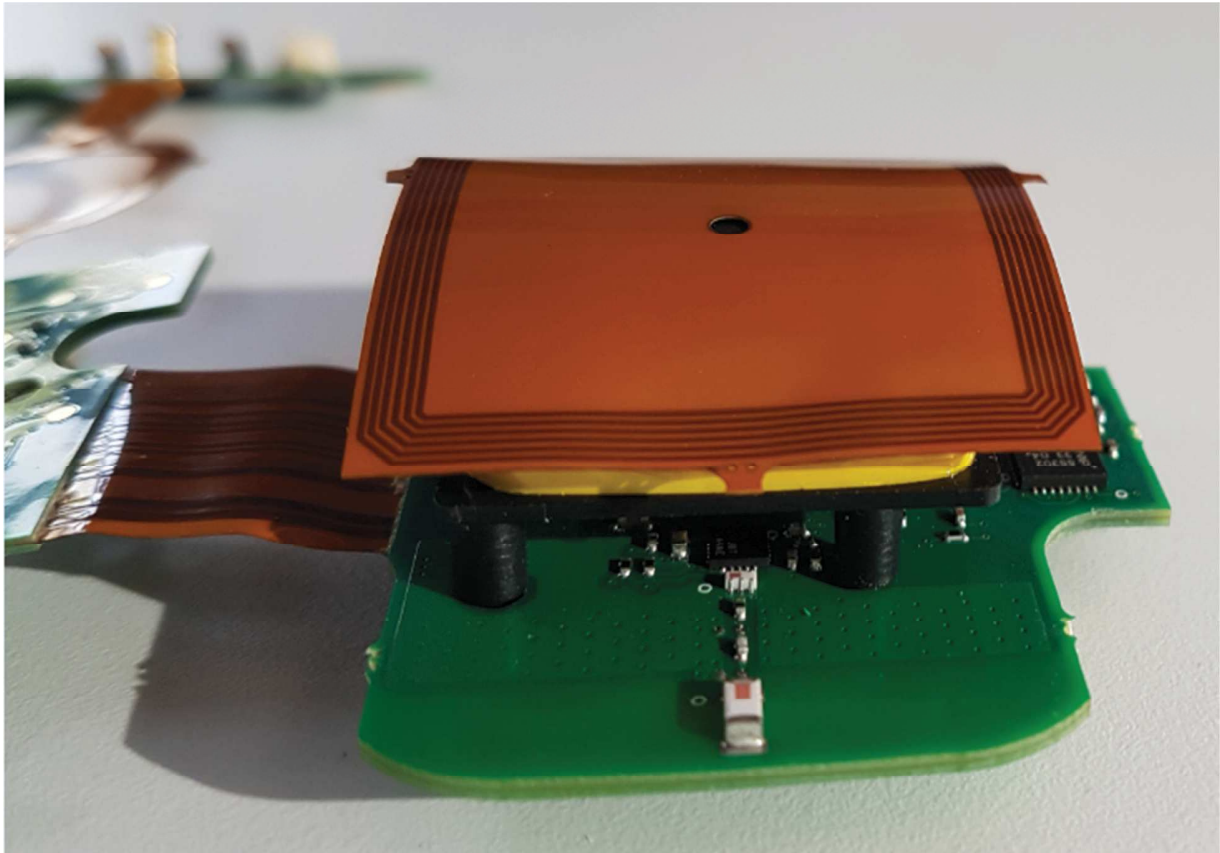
Side view of Radio Module and flexible PCB with radio coil
